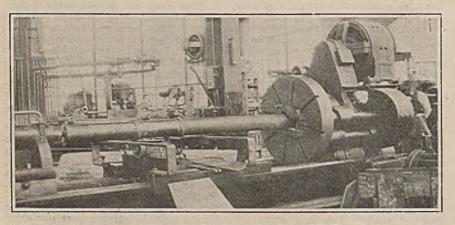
Lathe Temporarily Converted Into a Roller Shear
